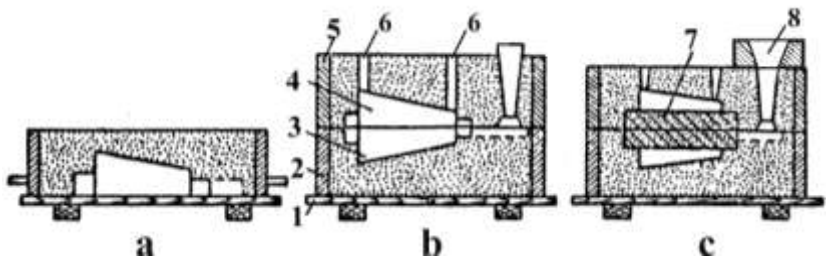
Hand two-part molding: bottom half-mould (a) and top half-mould (b) molding; c – assembled mould: 1 – molding board; 2 – bottom flask; 3 – bottom half-pattern; 4 – top half-pattern; 5 – top flask; 6 – gas relief sprue pattern; 7 – core; 8 – gating system
